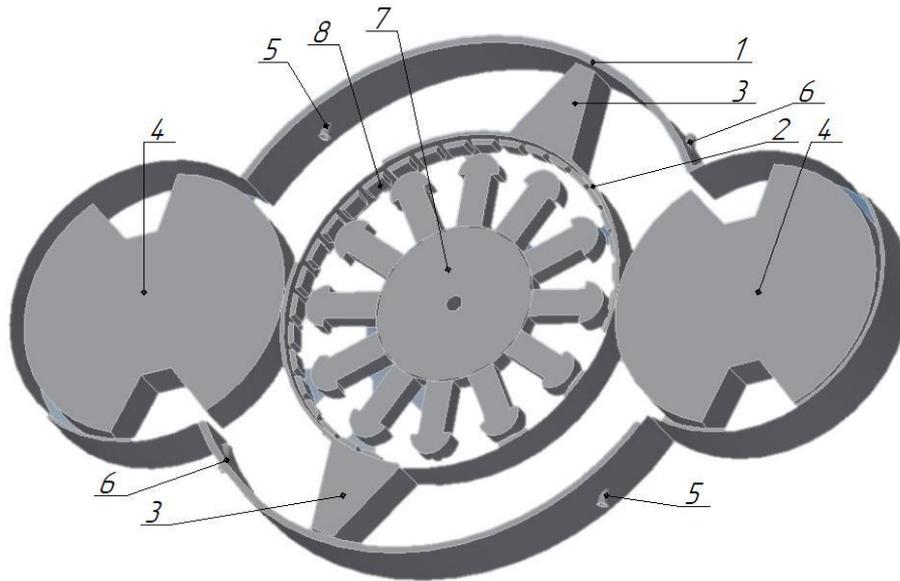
Diagram of a rotary vane engine N.N. Tverskoy with a built-in electric generator (1 - housing, 2 - rotor, 3 - pistons, 4 - sealing rollers, 5,6 - supply and exhaust pipes of the working fluid, 7 - stator, 8 - permanent magnets).
